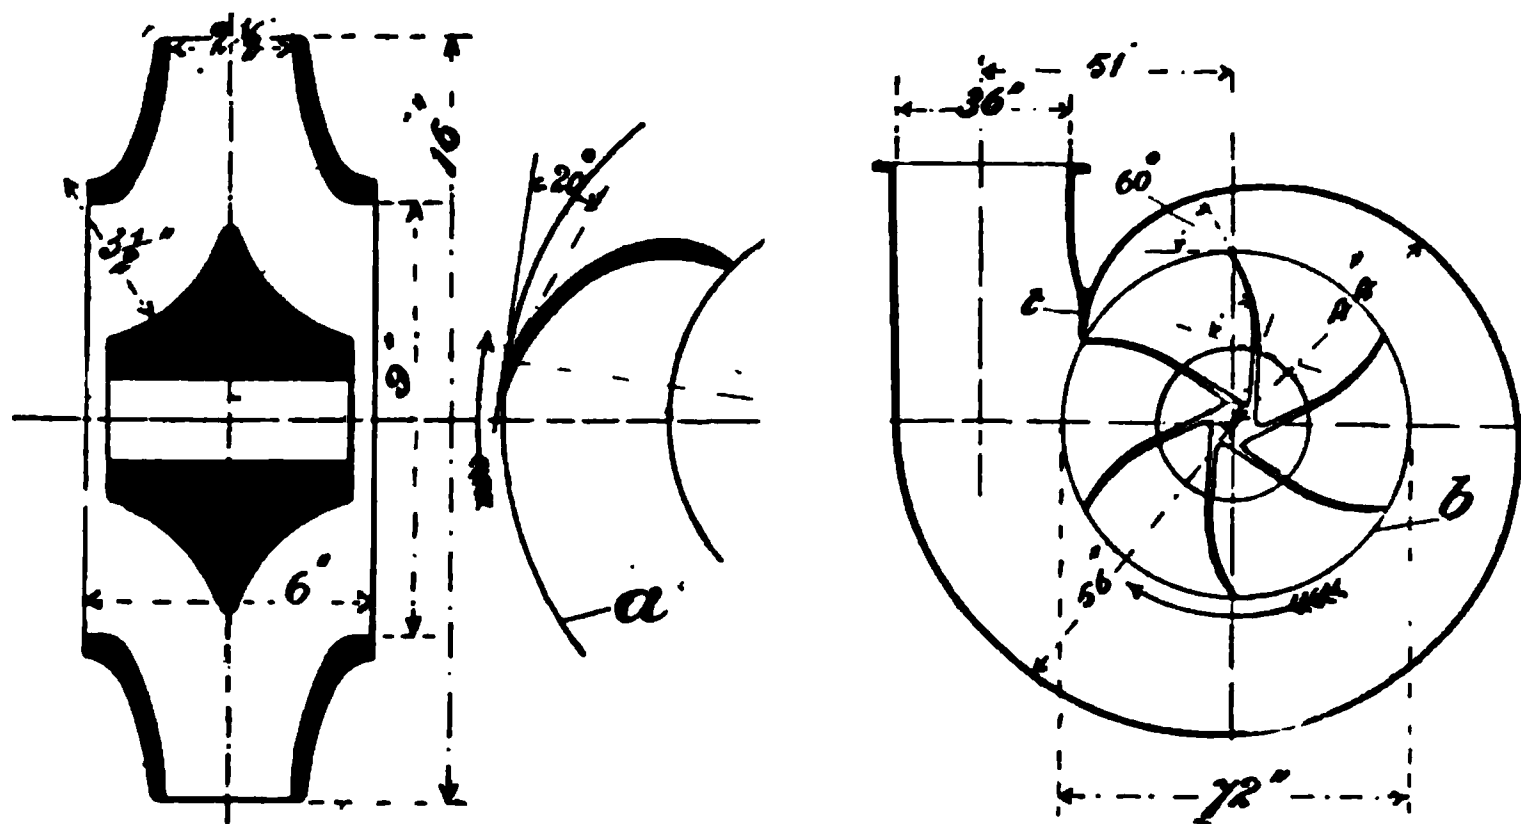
Impellers used in Ruston-Proctor Irrigation Pumps.
